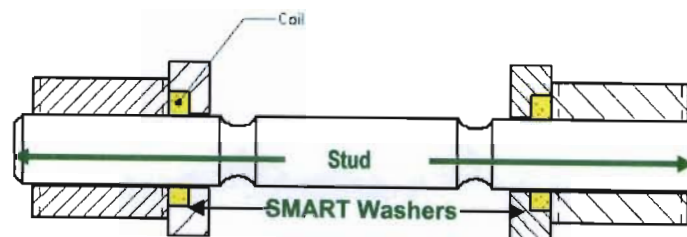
Assembly schematic layout of the tensile of the smart aircraft bolts.
